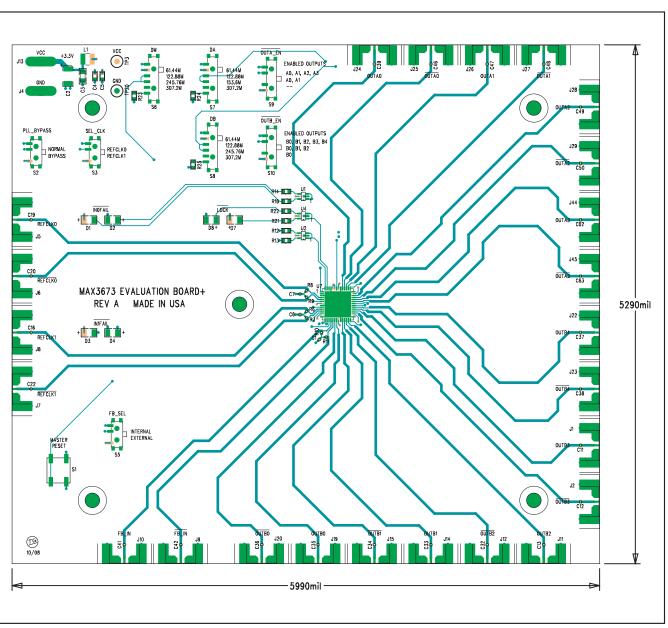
MAX3673 EV Kit Component Placement Guide—Component Side
